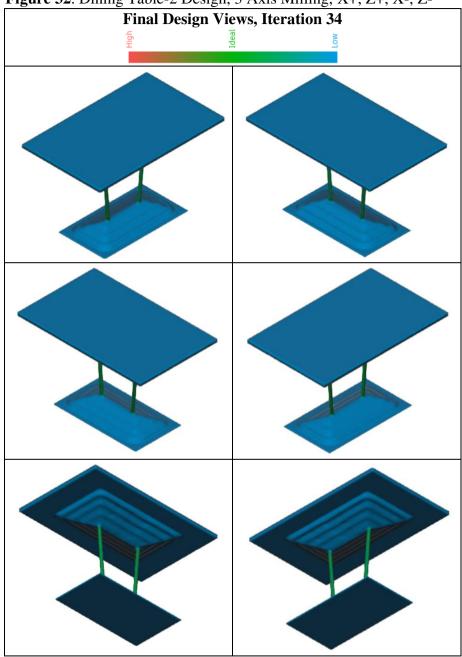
Dining Table-2 Design, 3 Axis Milling, X+, Z+, X-, Z-
